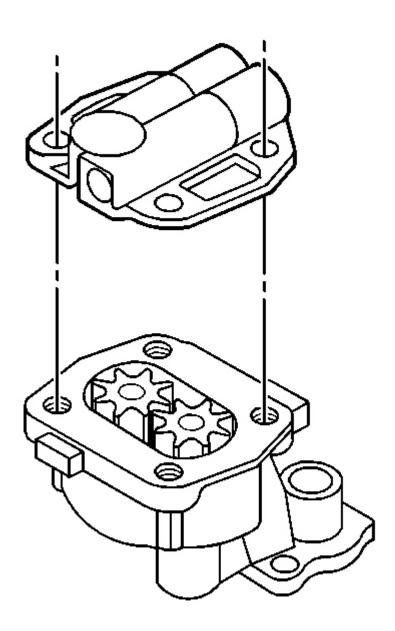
View Of Oil Pump Cover Courtesy of GENERAL MOTORS CORP.
